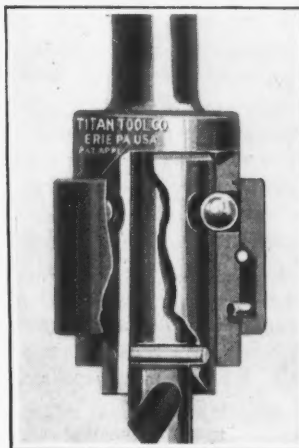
Quick-change Drill Chuck and Socket made by the Titan Tool Co.
